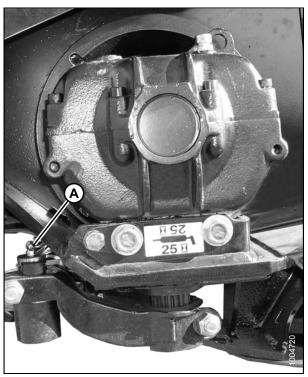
Knifehead (Single Knife - 1 Place) (Double Knife - 2 Places)
